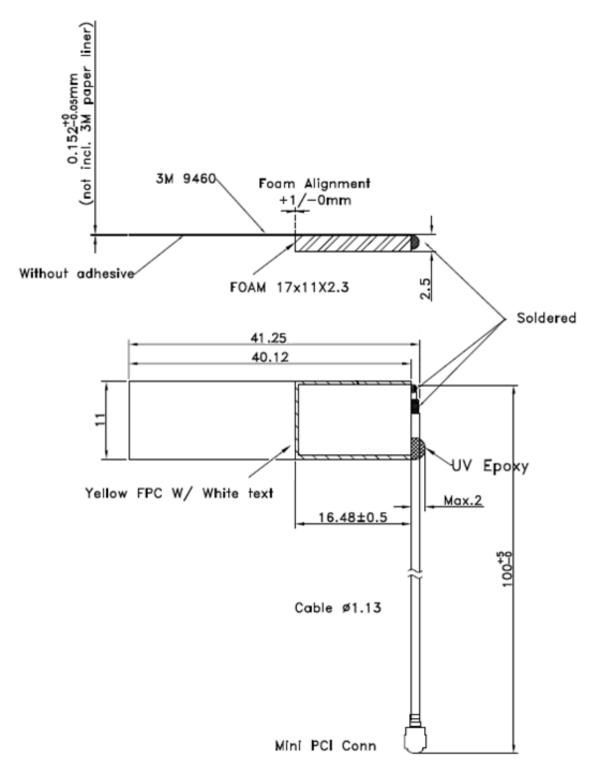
FlexPIFA mechanical drawing of 001-0014 and 001-0022
